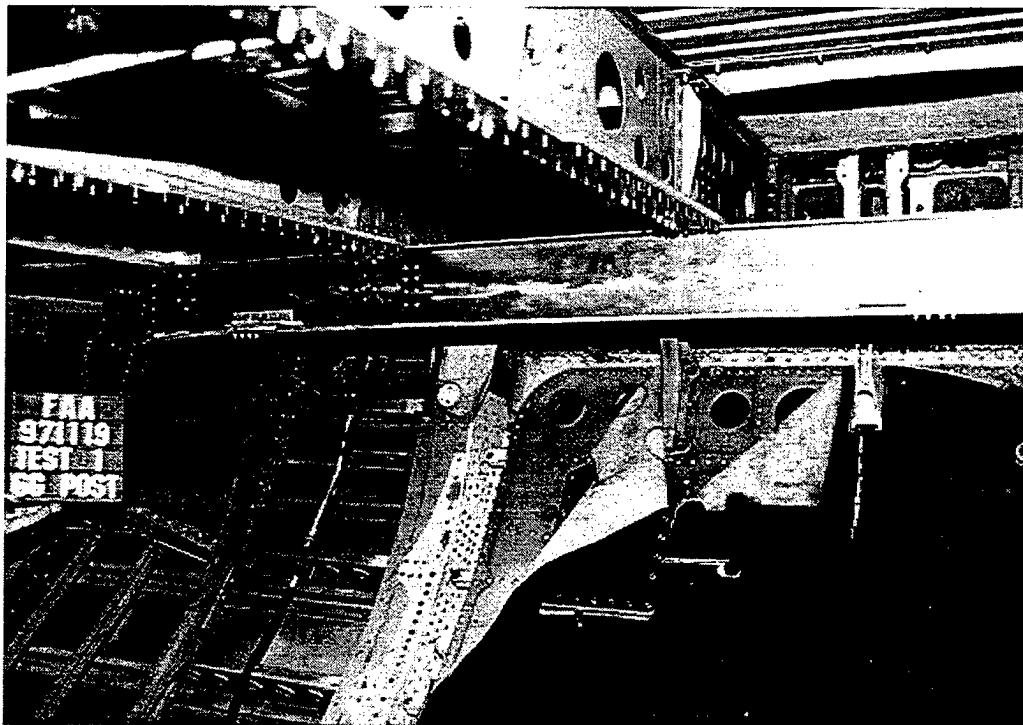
POSTTEST AUXILIARY FUEL TANK RIGHT ATTACHMENT
